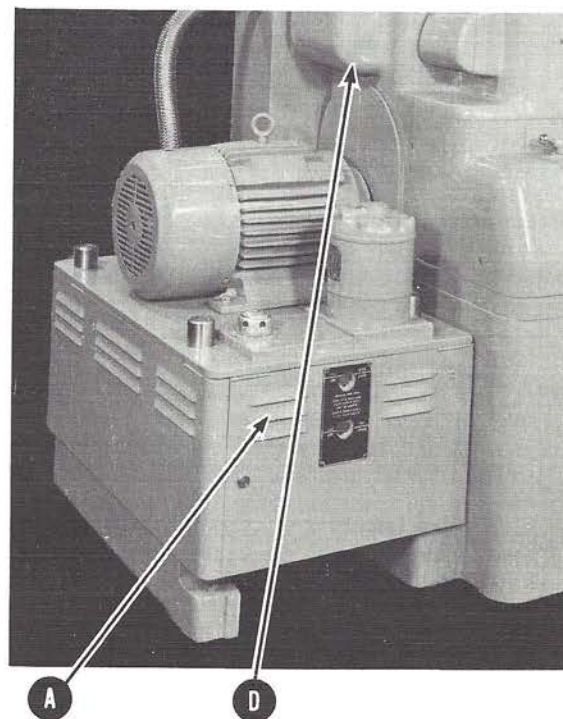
HYDRAULIC TANK AND ELEVATING SCREW WHEEL
